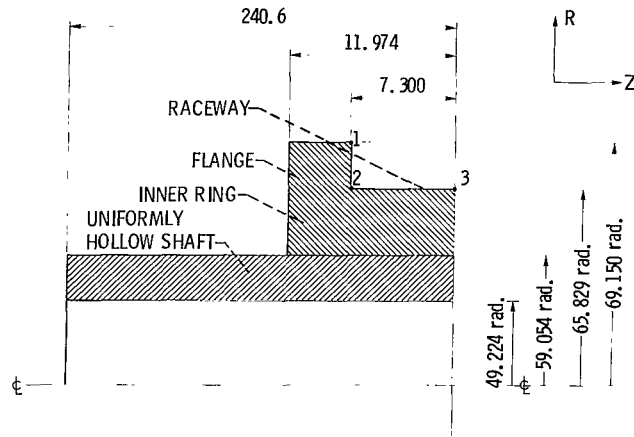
Half-section of symmetrical bearing inner ring and shaft assembly. (Dimensions are in mm.)
